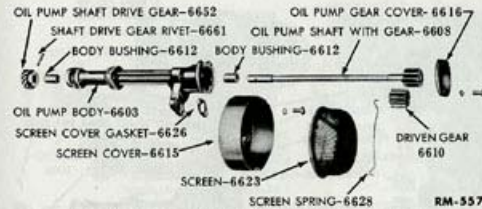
Oil Pump (Without Relief Valve), Disassembled
